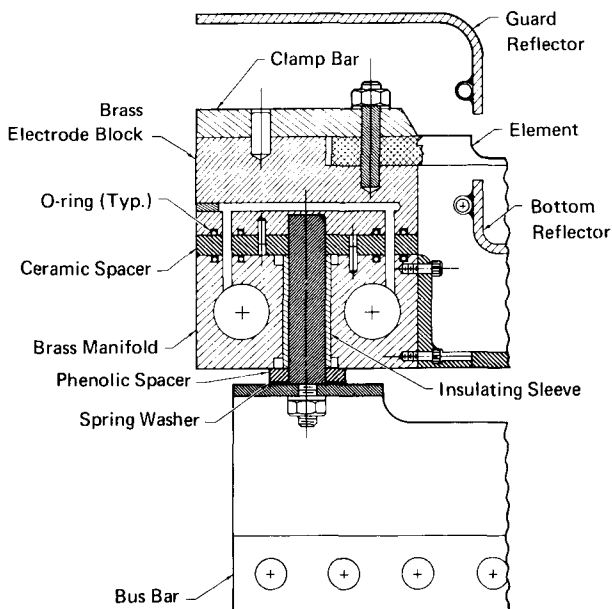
ELECTRODE END BLOCK ASSEMBLY
